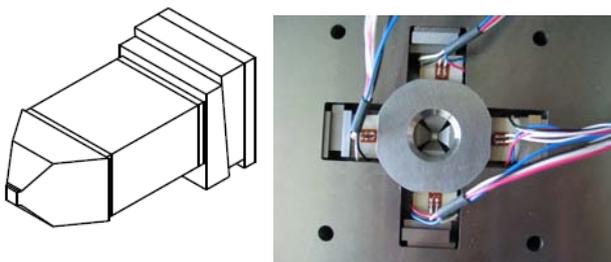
15x10mm piezo actuator assembly with mechanical amplifier(left) and the die insert (2 x 2 mm) mounted in the prestressing unit
